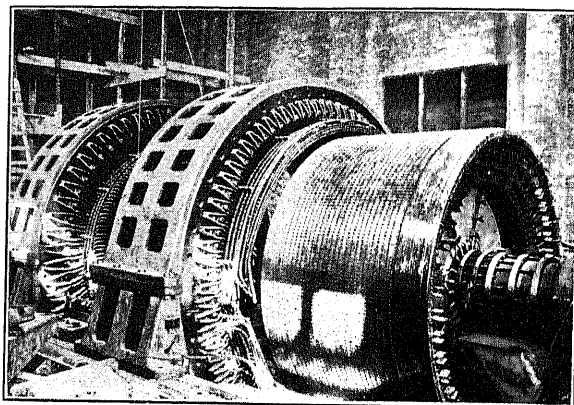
ASSEMBLY OF 35,000-KW. FREQUENCY CONVERTER SET WITH STATOR OF INDUCTION UNIT MOVED OVER TO CLEAR ROTOR
